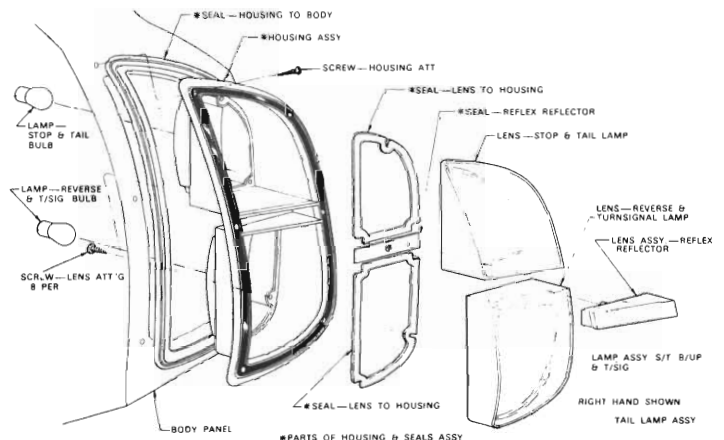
Station wagon tail lamp assembly (disassembled view)
